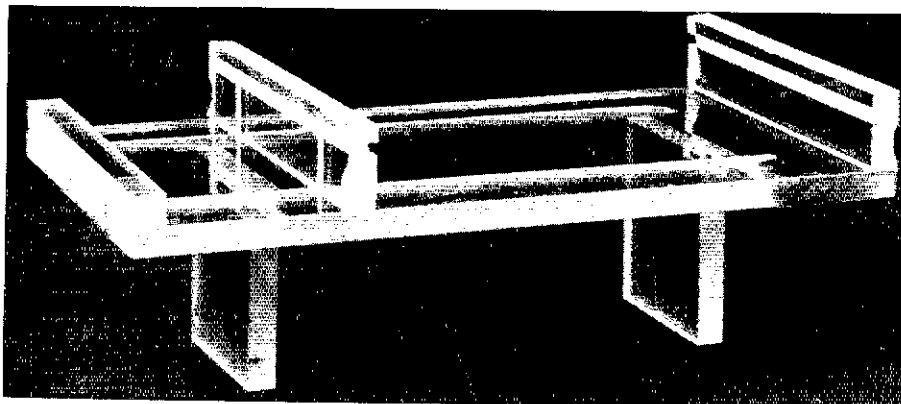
The finished PC-board holder. To accommodate PC boards of varying widths, the left-hand clamp is adjustable.
